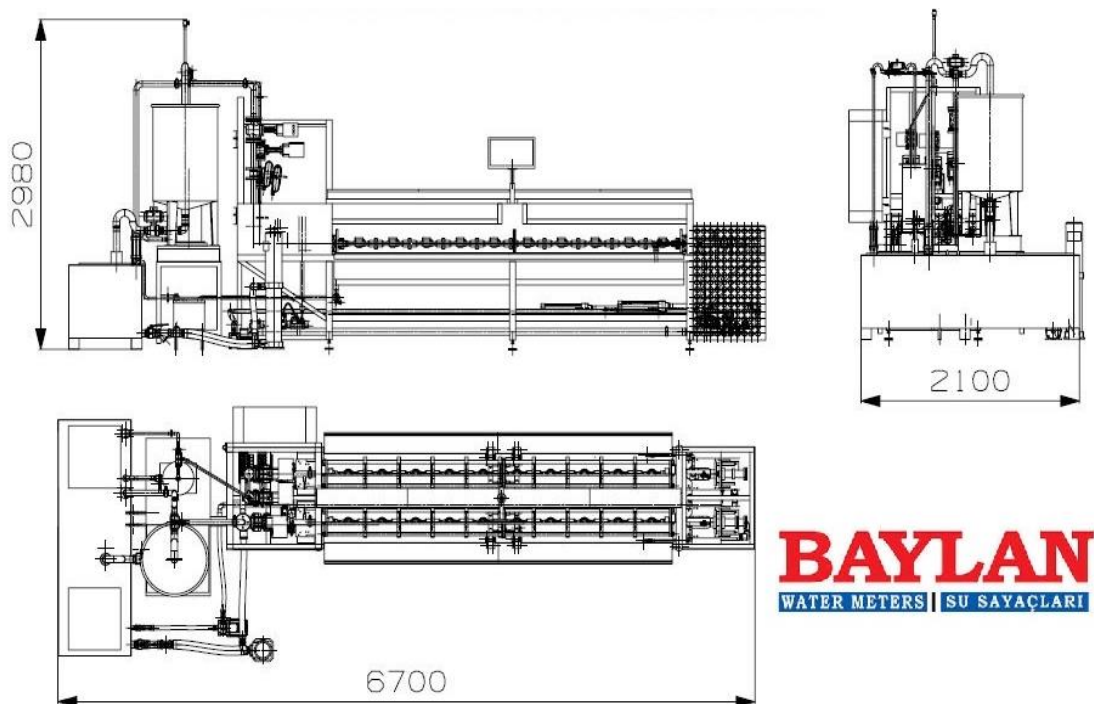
BTB-08 Double Line Test Bench Dimensioned Technical Drawing
